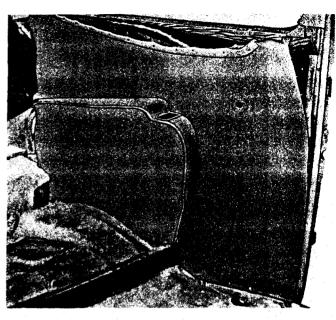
Illustration No. 81 Rear Quarter Window Regulator Board Removal.
